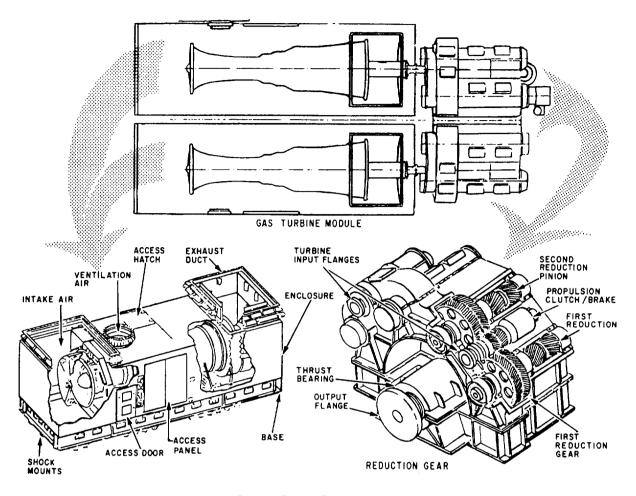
Typical gas turbine reduction gear module arrangement.
